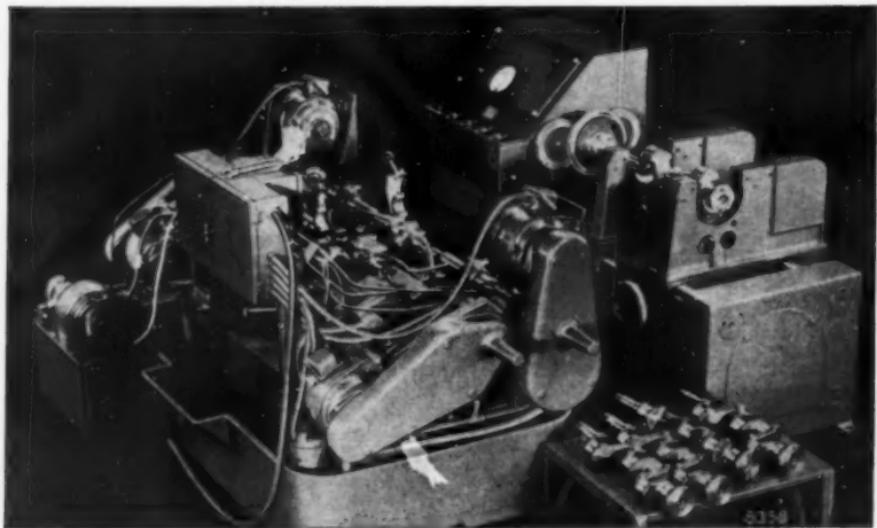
Equipment for measuring and correcting unbalance in four throw crankshafts.
